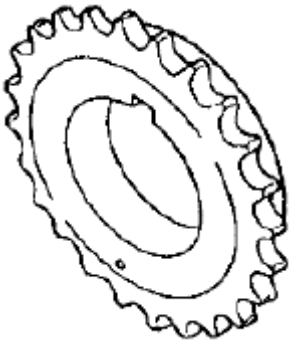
Identifying Crankshaft Timing Sprocket Teeth
